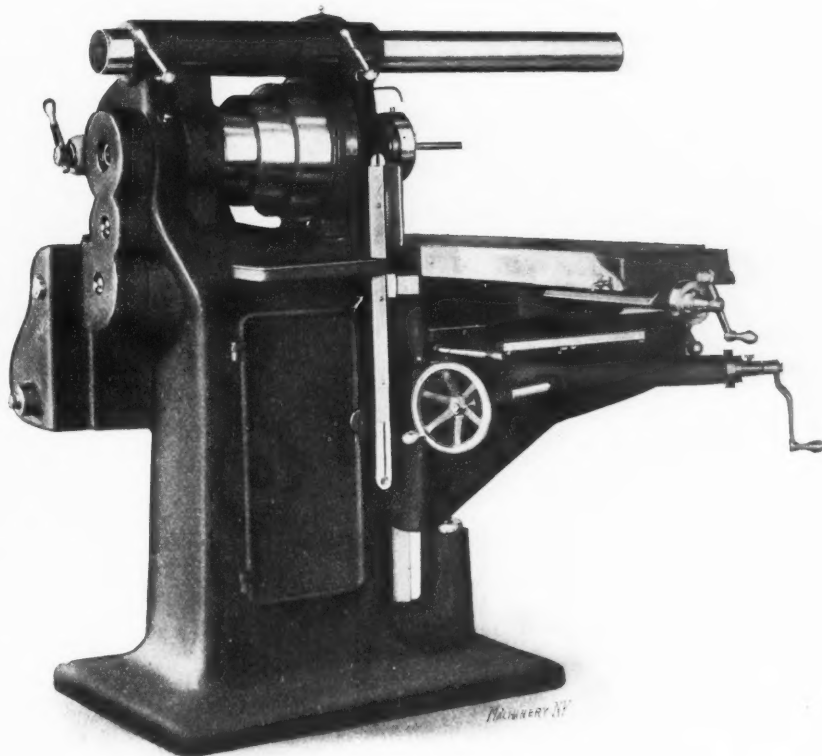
Side View, showing Arrangement of Adjusting Handwheels and Cranks
